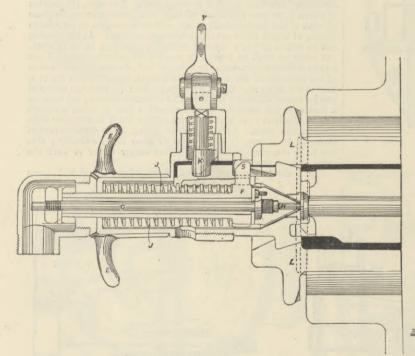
"B" or Single Motion Mechanism. A, Breech screw; B, screw fixing breech screw; C, carrier arm; D, stud; E, S, safety stop; F, lever; G, link; H, sliding block; I, J, parts of striker; V, bush; T, trigger.
